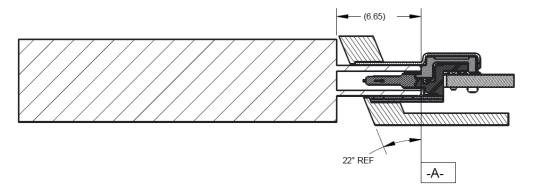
Recommended Minimum Plug Overmold Clearance
